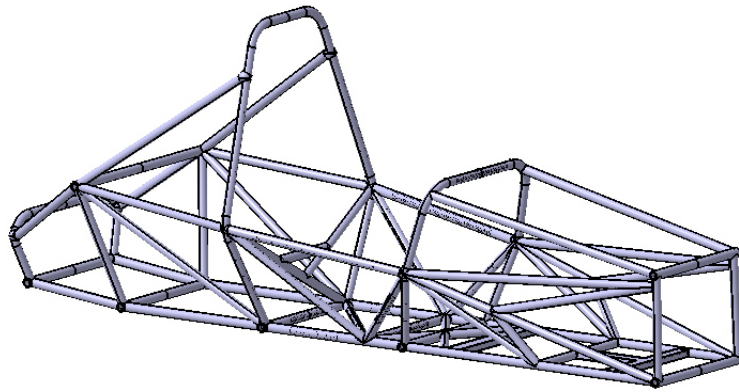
Honeycomb inserts assembled in the 3D of the tubular chassis.
